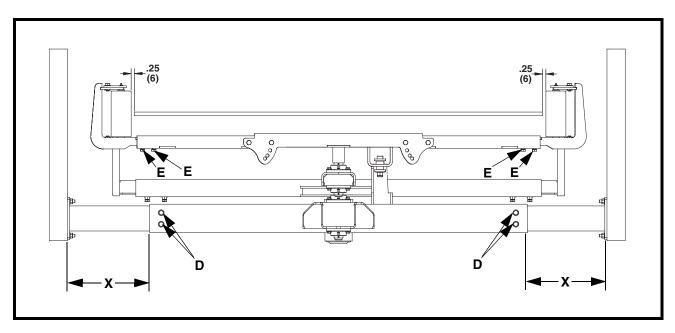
Mounting Dimensions–Martin® Tracker<sup>TM</sup> Monster (Lower Unit)
